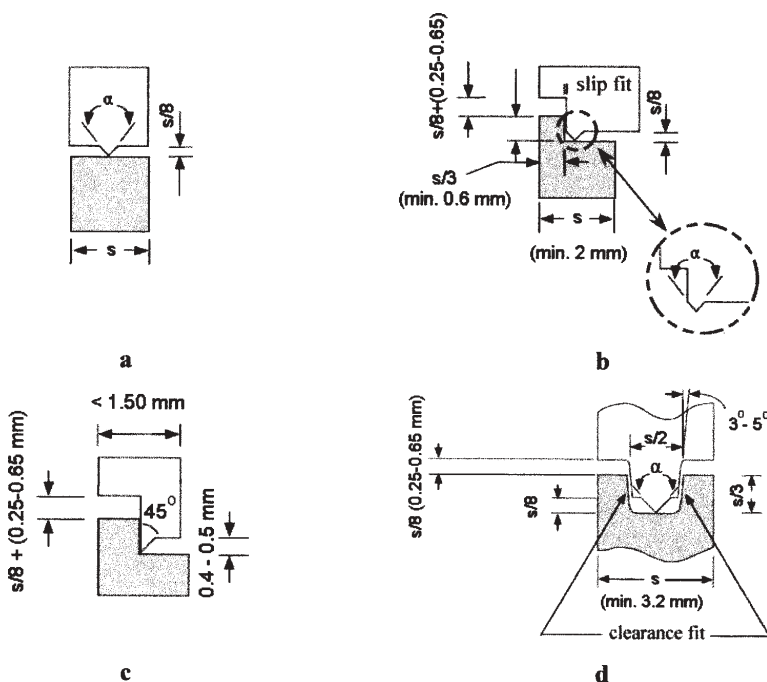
Types of ultrasonic welds with acoustical energy directors
